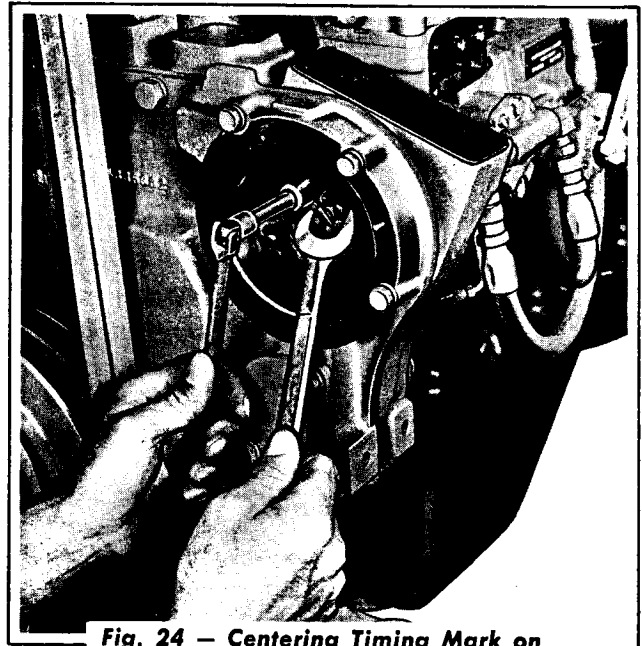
Centering Timing Mark on Drive Gear Hub
